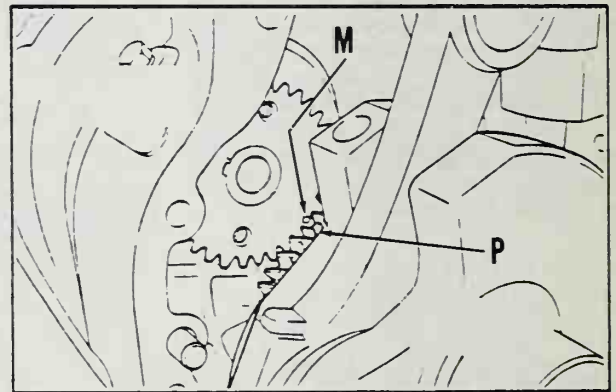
Balancer gear mark (M) and red paint mark (P) on crankshaft gear should be aligned on Models WD1-660, WD1-670 and WD1-750.
